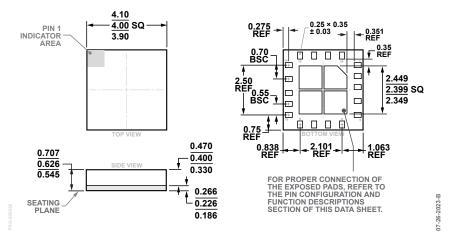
18-Terminal Land Grid Array [LGA] (CC-18-2) Dimensions shown in millimeters
